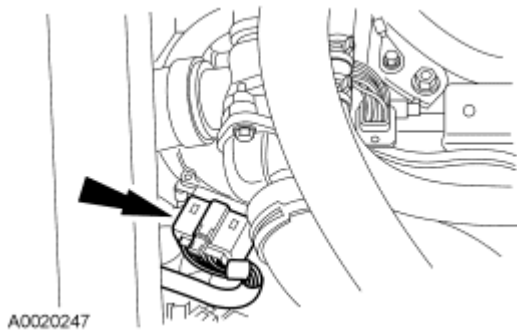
Locating Transmission Range (TR) Sensor Electrical Connector
